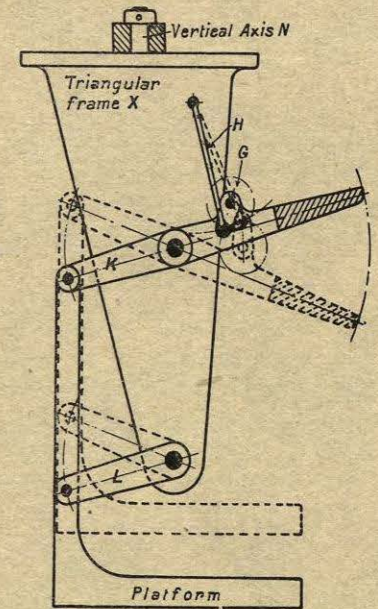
Adjustable Platform of Wellman-Seaver Charging Machine.
